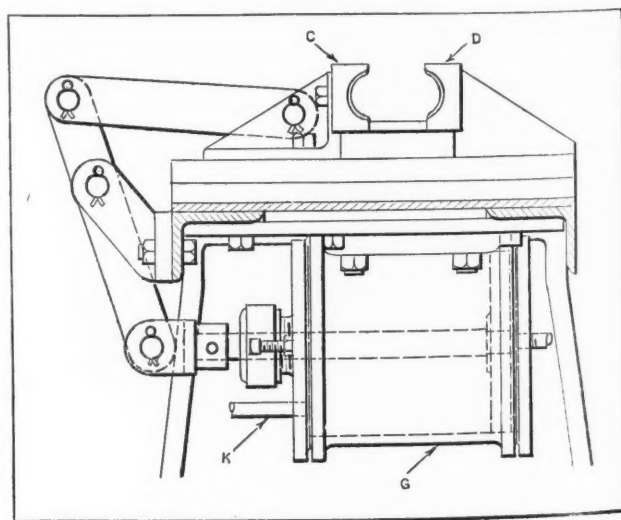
Work-clamping Mechanism of Machine Shown in Figs. 3 and 7
